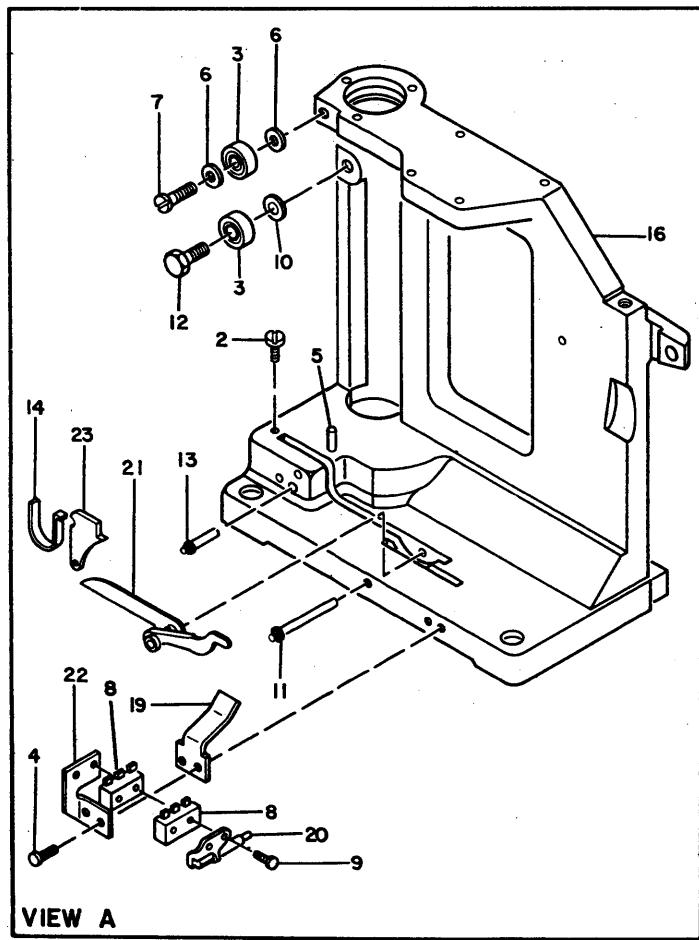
CARRIAGE HOUSING ASSEMBLY. SEE LIST 10.
